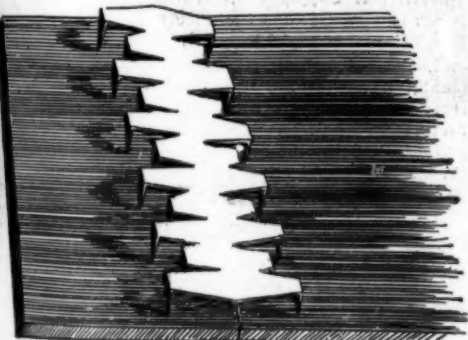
SECTION OF LACED BELT, SHOWING SAMSON FASTENER.
